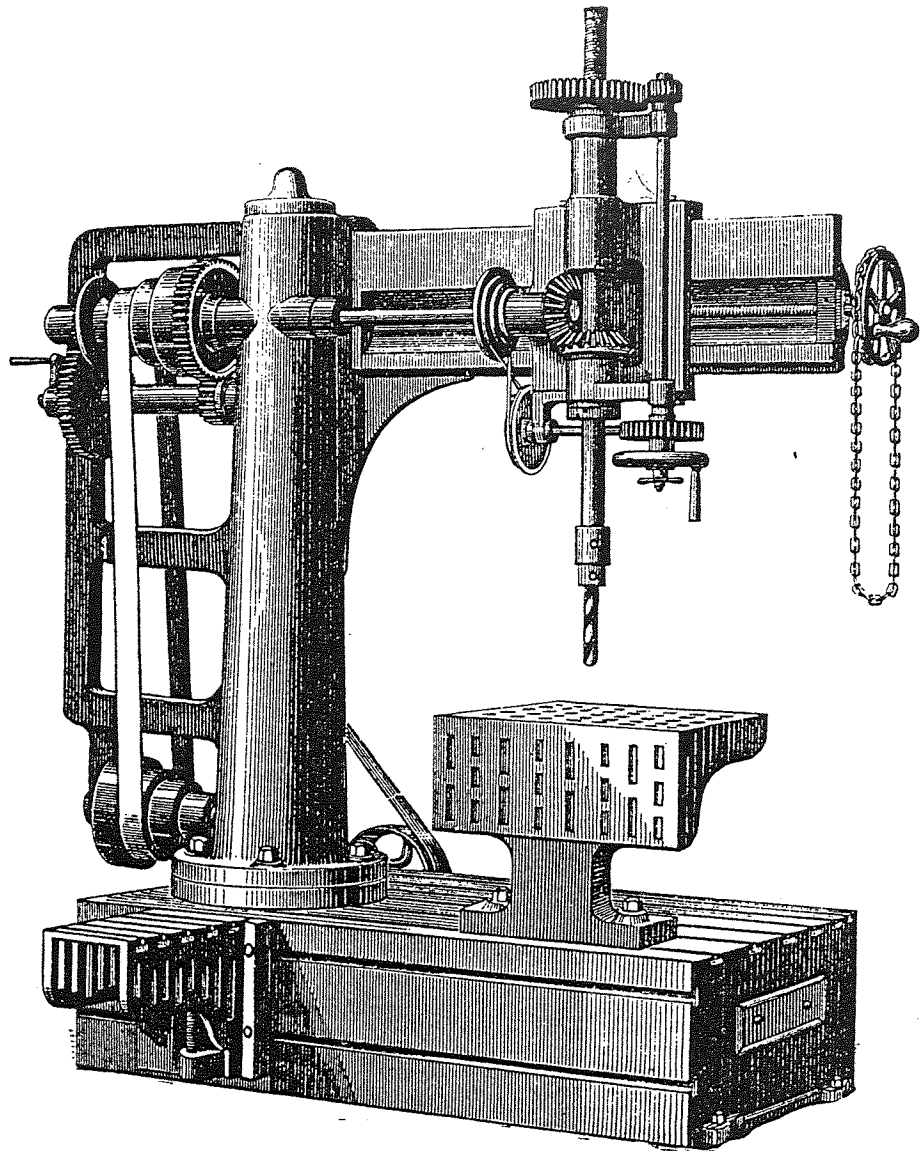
EARLY RADIAL ARM DRILLING MACHINE WITH TWIST DRILL-1874
